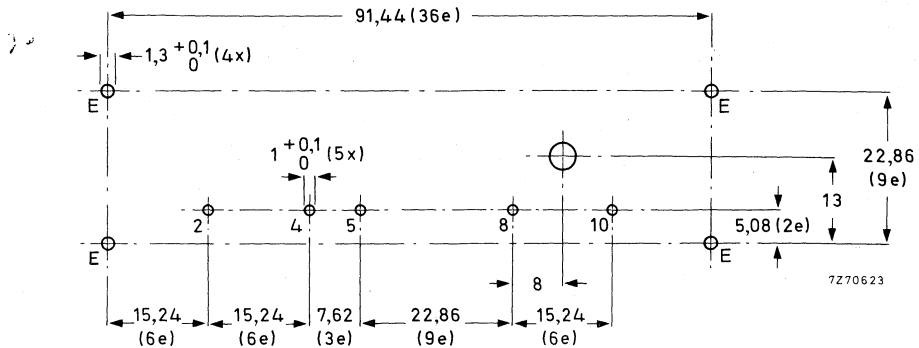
Piercing diagram viewed from solder side of board; $e = 2,54 \text{ mm}$ (0,1 in)
